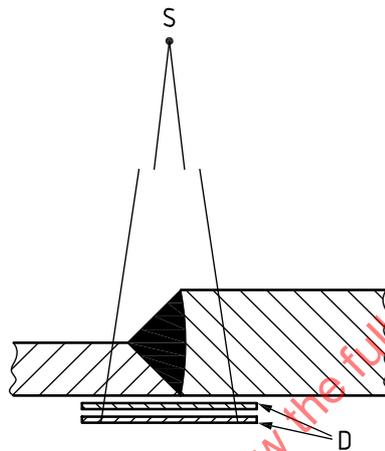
Arrangement for testing with a multi-detector technique, applicable for CR
